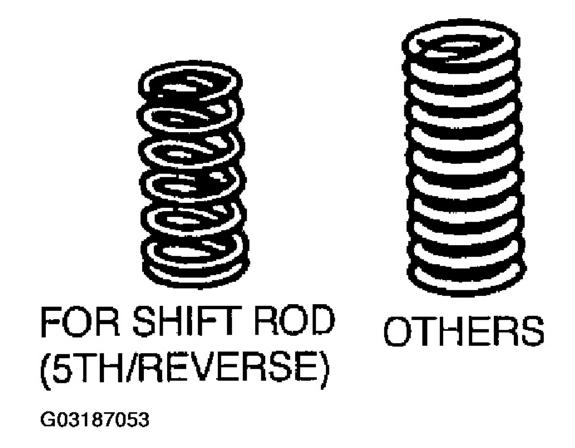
Identifying 5th/Reverse Shift Rod Spring Courtesy of MAZDA MOTORS CORP.
